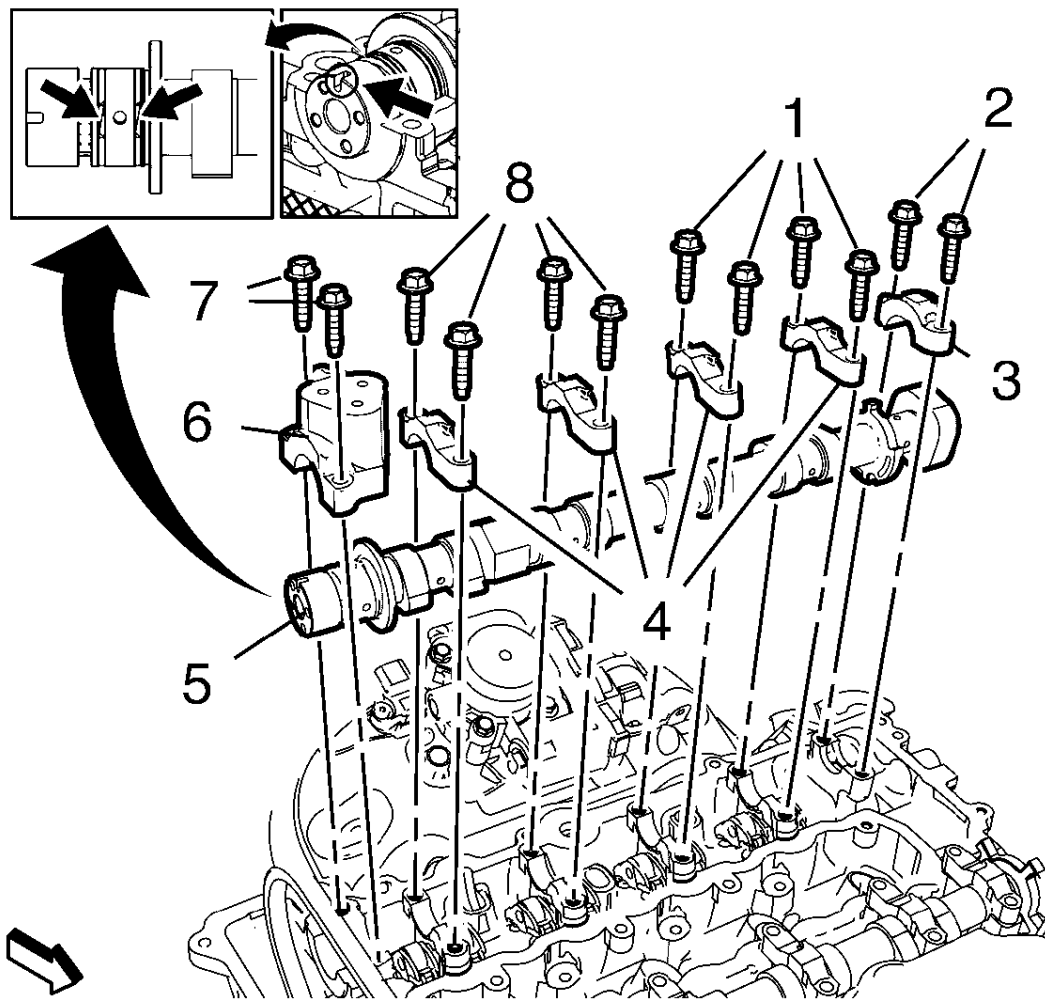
Intake Camshaft, Bearing Caps And Bolts
